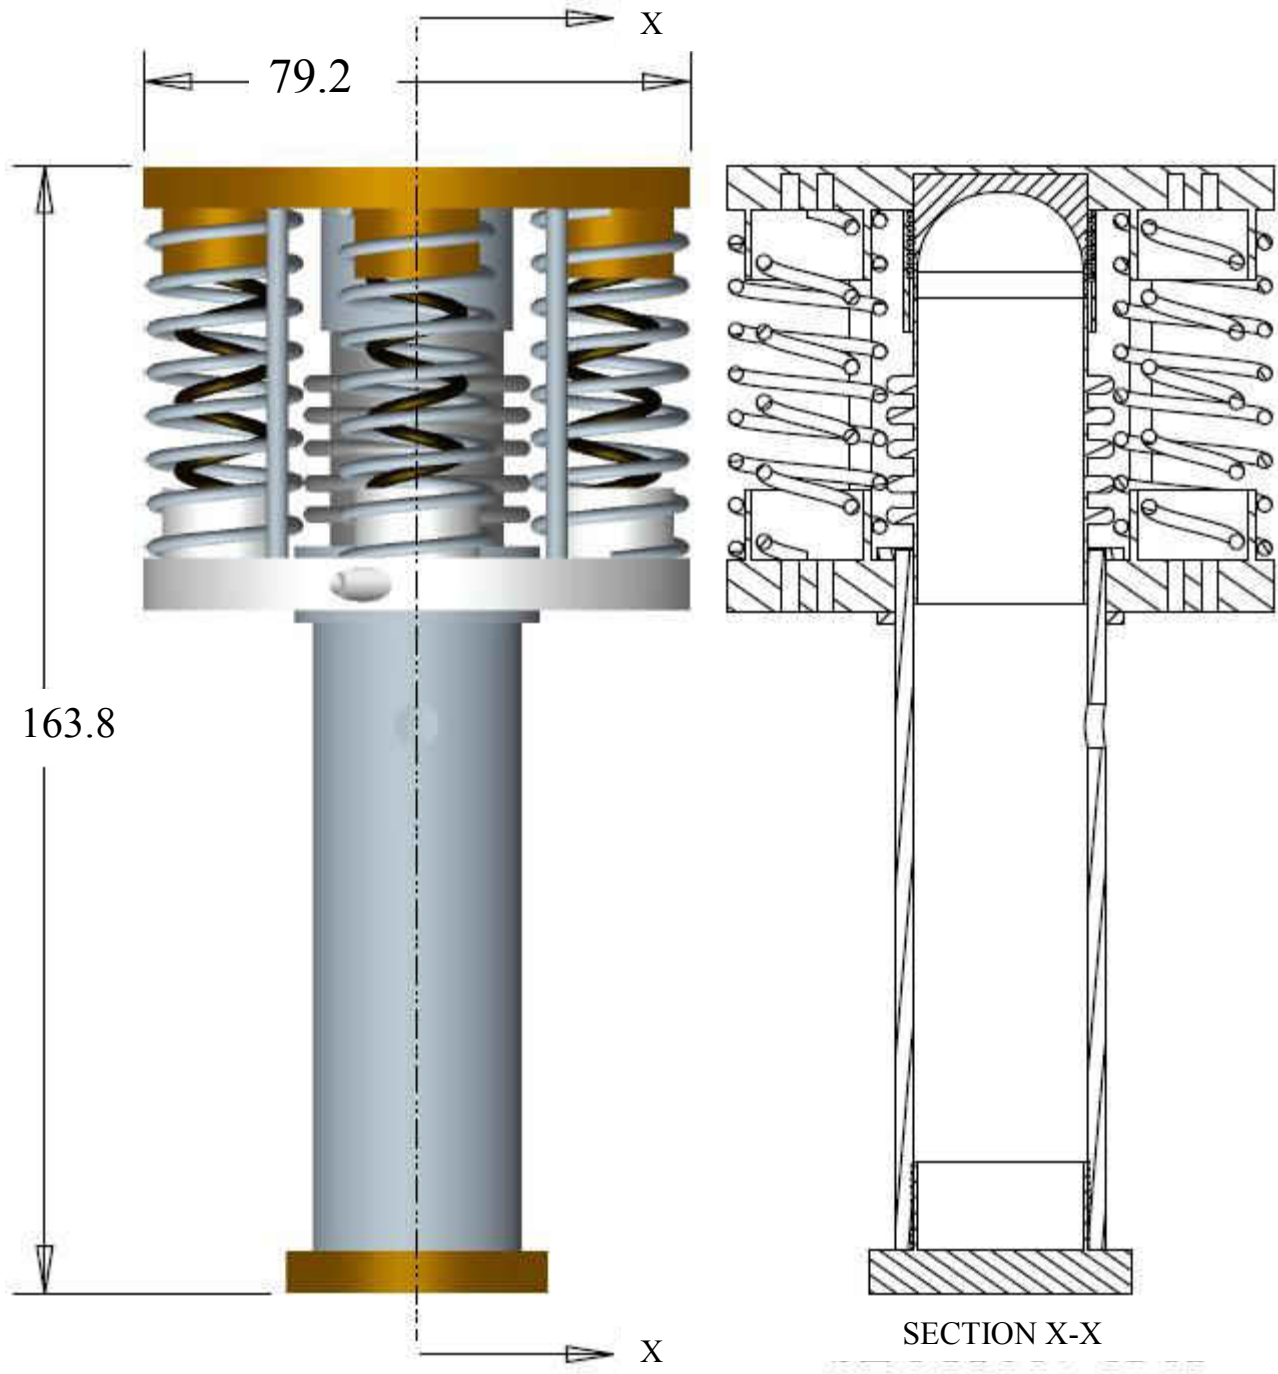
Schematic of final thermal switch assembly (dimensions in mm)
